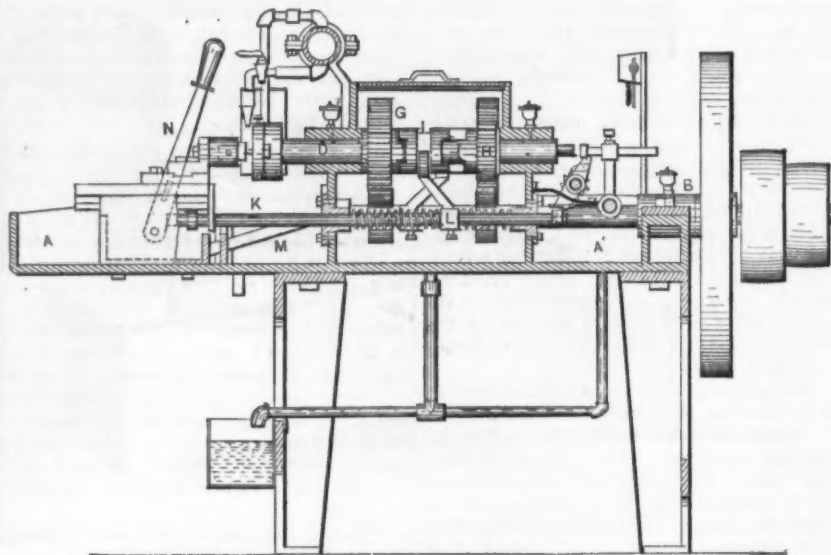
Vertical Section Through One of the Threading Shafts.
